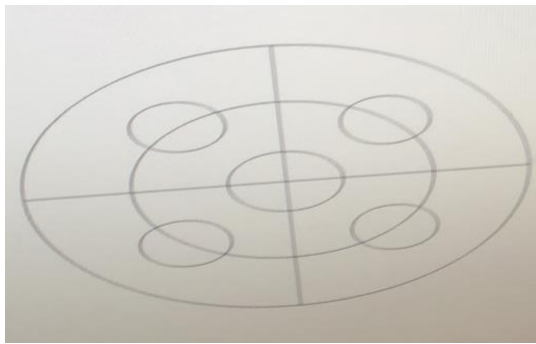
Inaccurate diameter of the center hole in the gear
